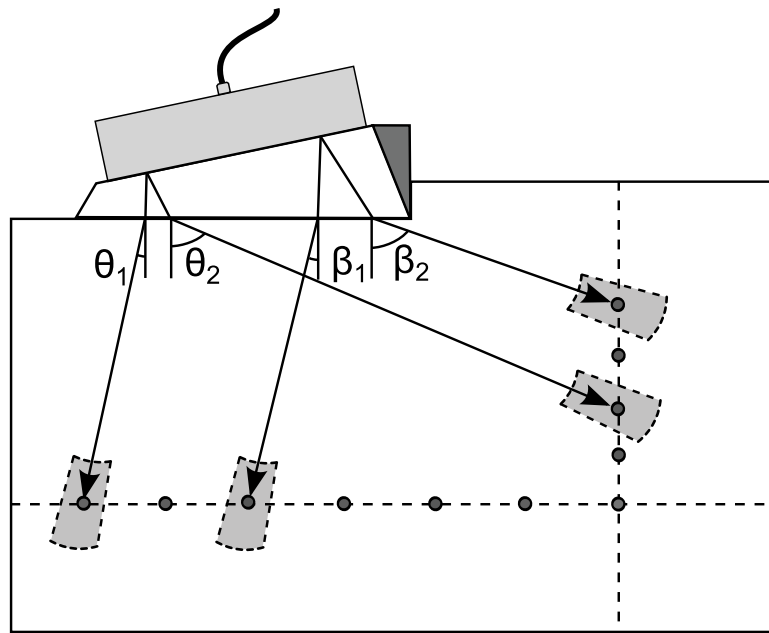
A sketch of a concept for a calibration block used to complete the combined equipment check.
